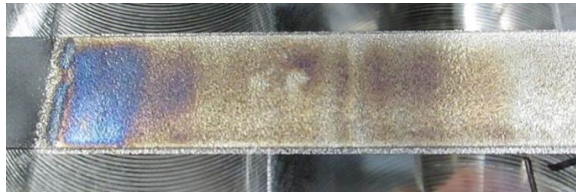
Steel to steel weld with significant surface coloration.
